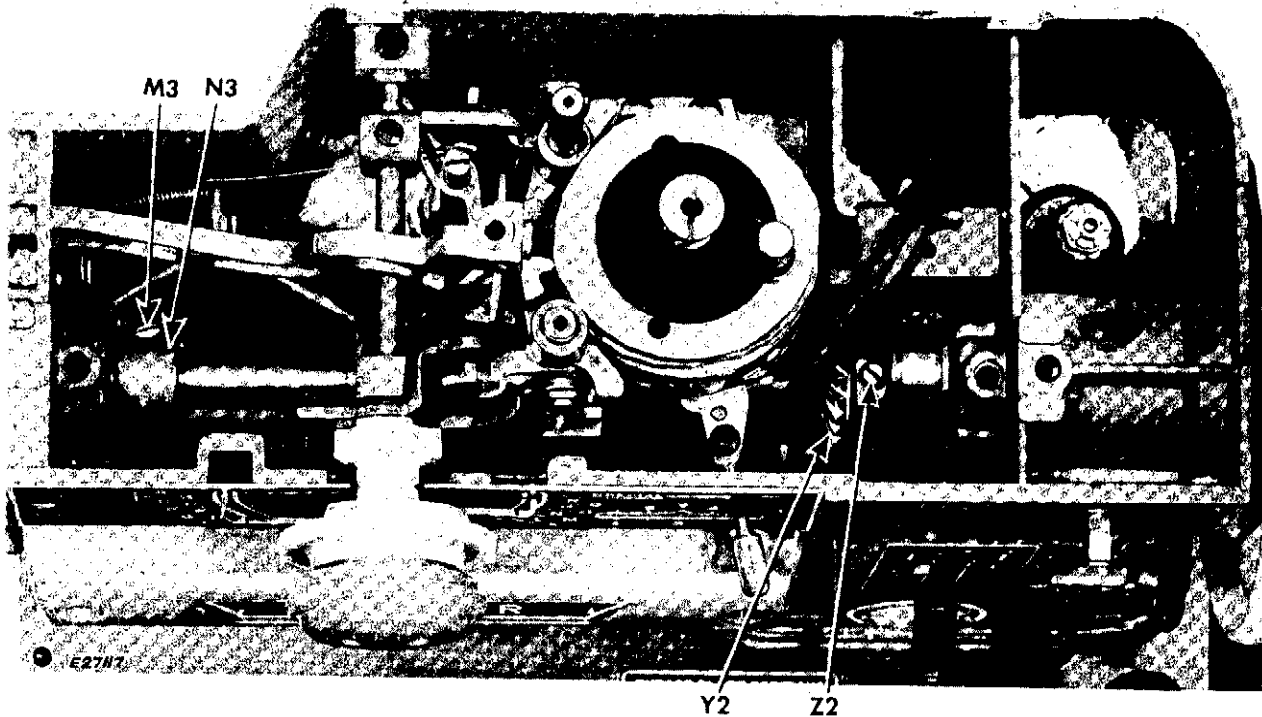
Adjustments for End Play or Binding of Arm Shaft
